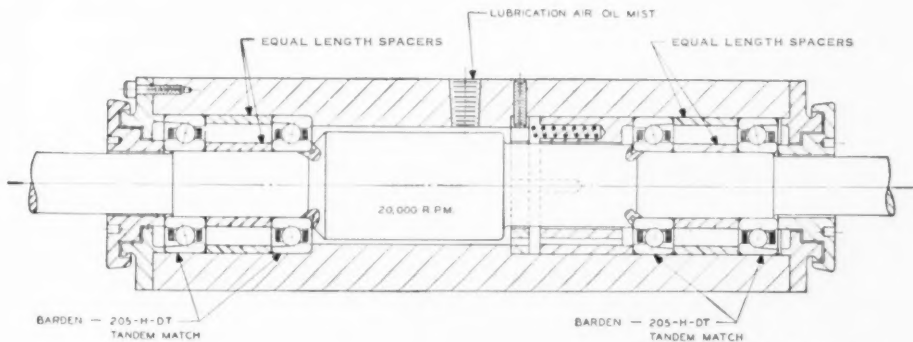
Details of a high speed internal grinding spindle showing use of labyrinth type rotating seals.
